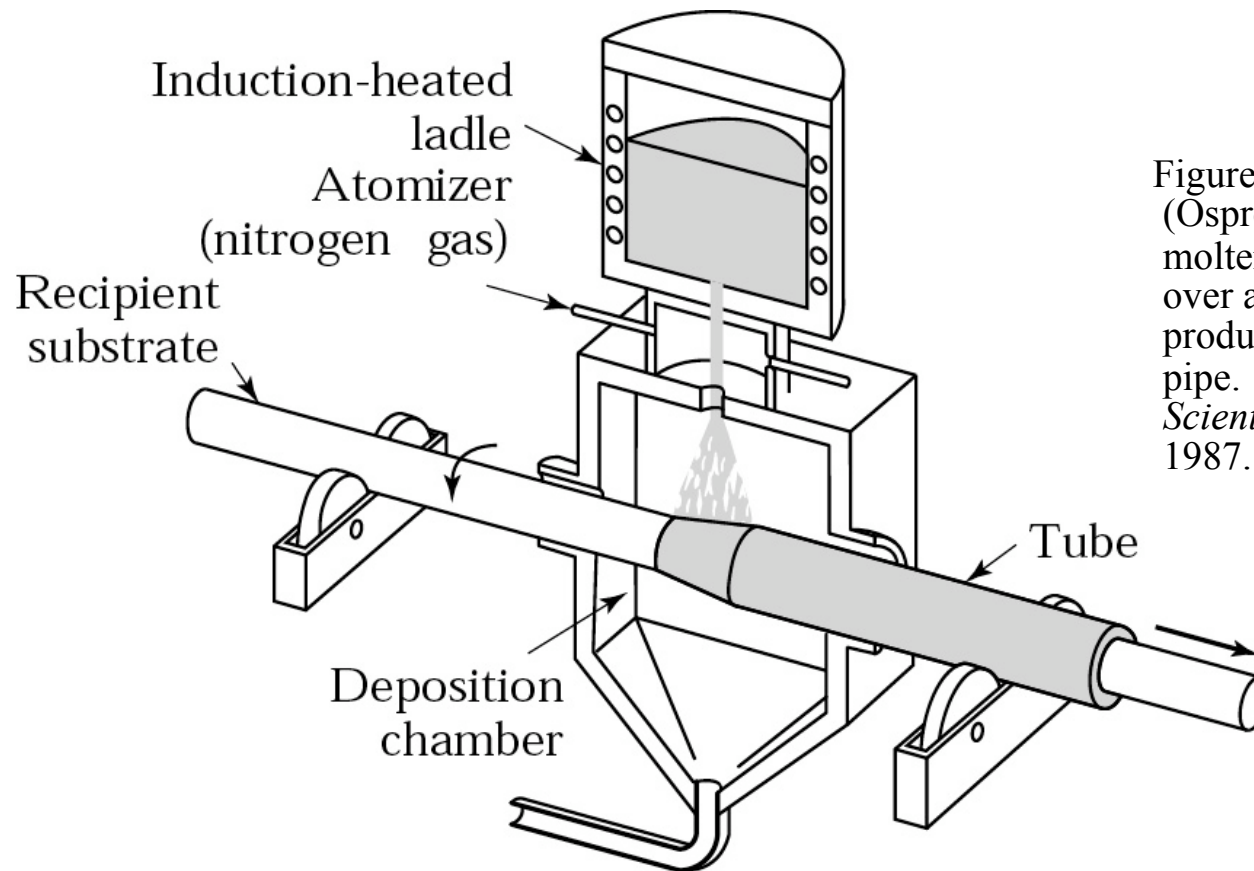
Spray casting (Osprey process), in which molten metal is sprayed over a rotating mandrel to produce seamless tubing and pipe. *Source: J. Szekely, Scientific American, July 1987.
